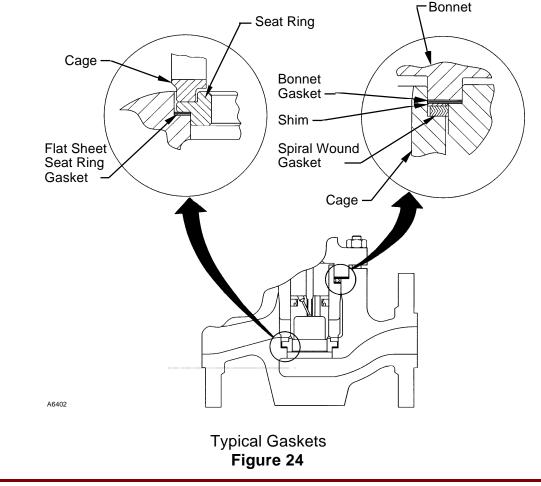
shows the gaskets that are included in a standard cage-guided valve.
